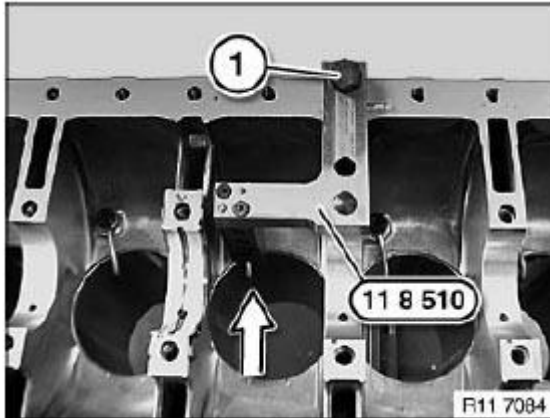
Identifying Special Tool 11 8 510 And Bolt
